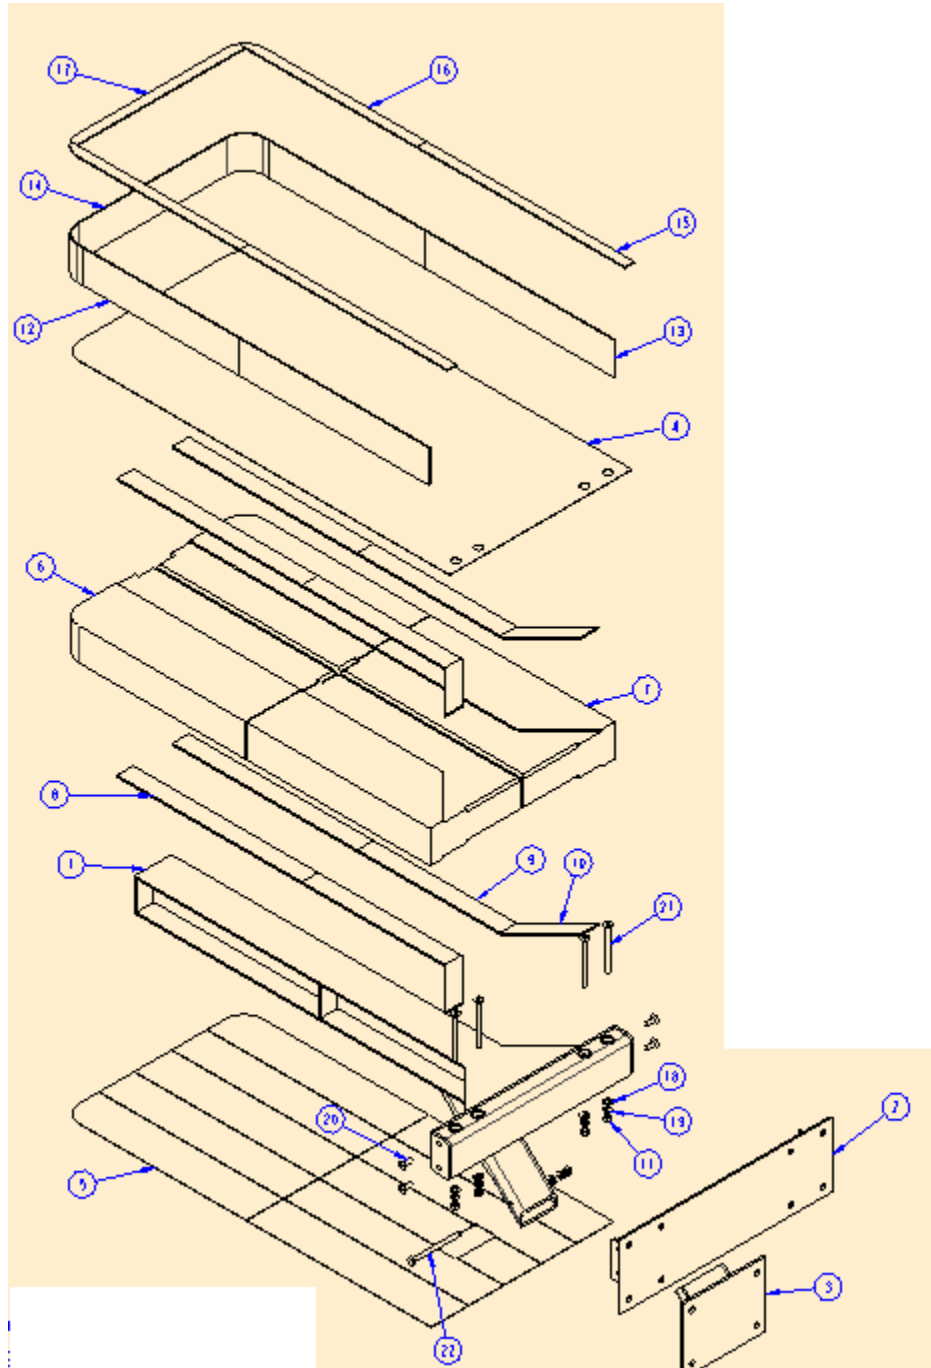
An Exploded View of the Crushable Table Showing all the Table Components
